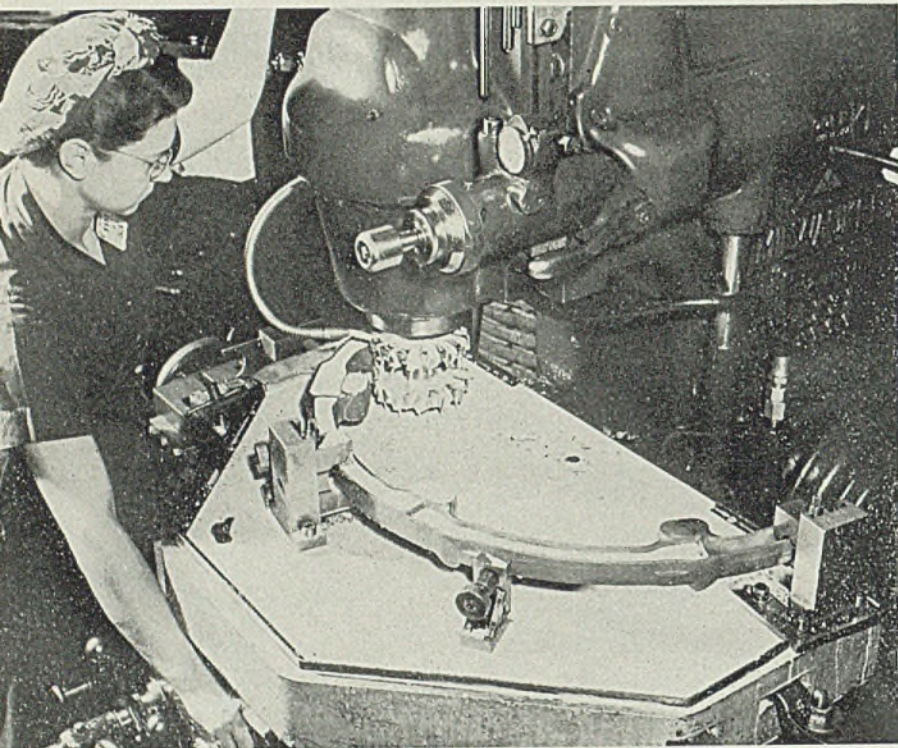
Above, milling operation on ring bosses of half ring. Early design involved quarter-section rings, flash welded into half ring before machining
